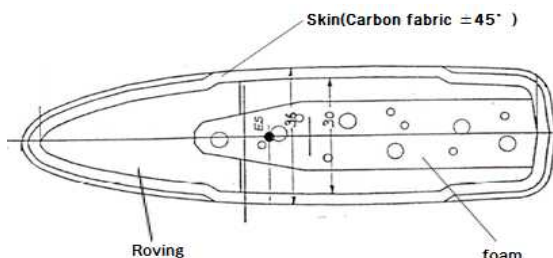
BO-105 Blade Flexure Section Shape - 830mm
